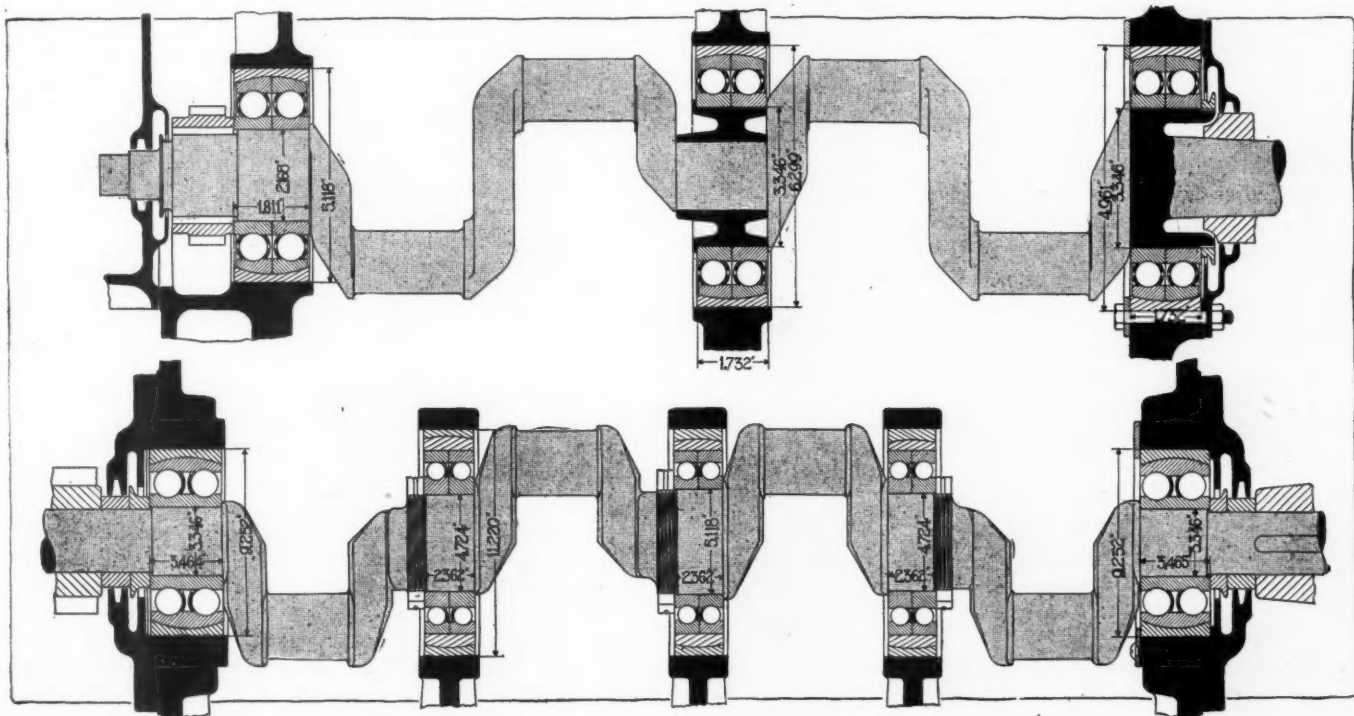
Upper, three-bearing crankshaft for four-cylinder motor. Lower, five-bearing crankshaft for four-cylinder motor
